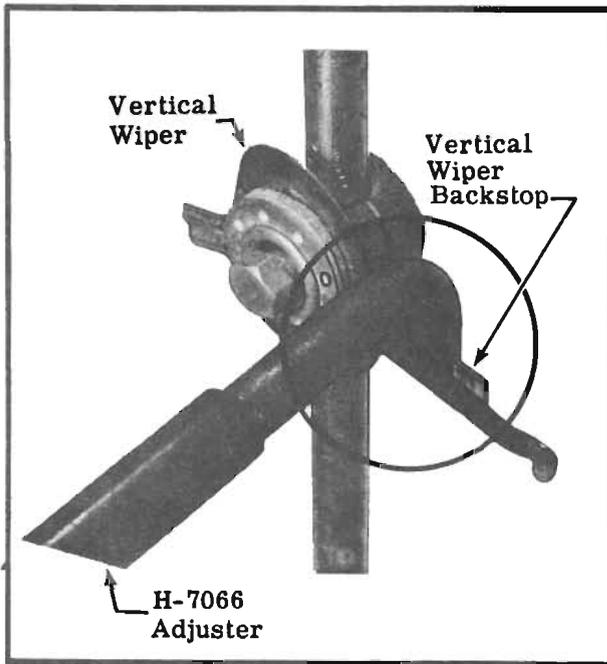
Method for Adjusting Vertical Wiper Backstop is Shown in Circle.
